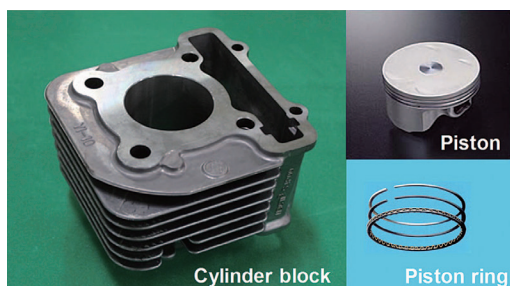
Appearance of tested components, cylinder block, piston and piston rings.
